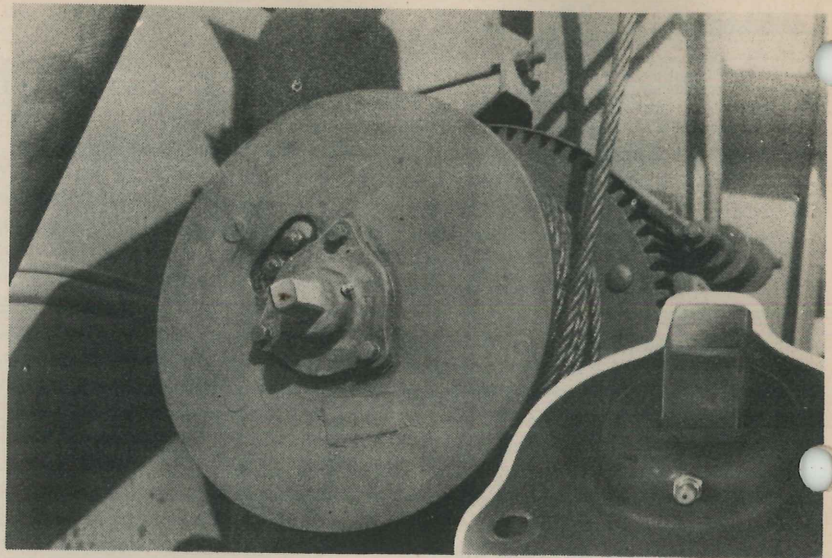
Close up the old grease-fitting location by brazing, and install a new fitting in the crank square.
